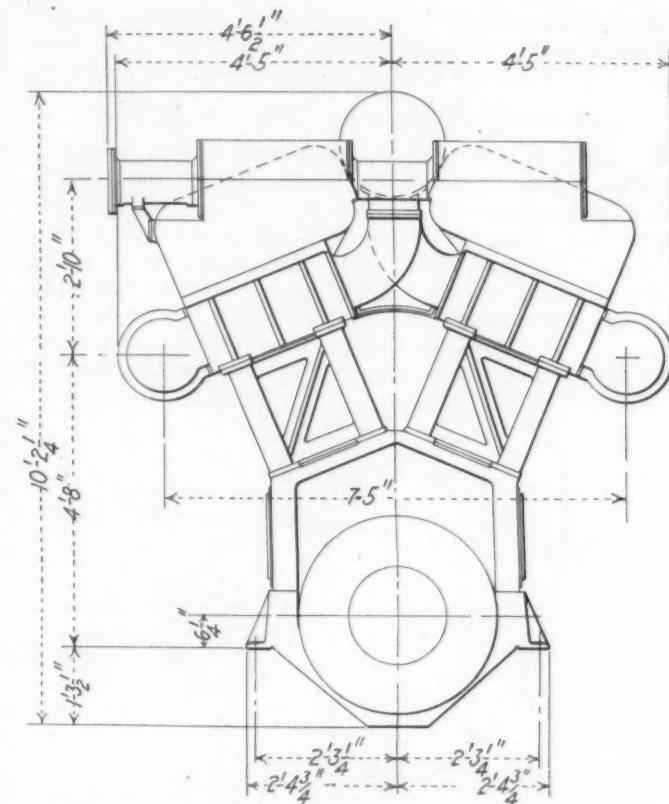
FRONT-END ELEVATION OF 3000-H.P. DIESEL ENGINE
